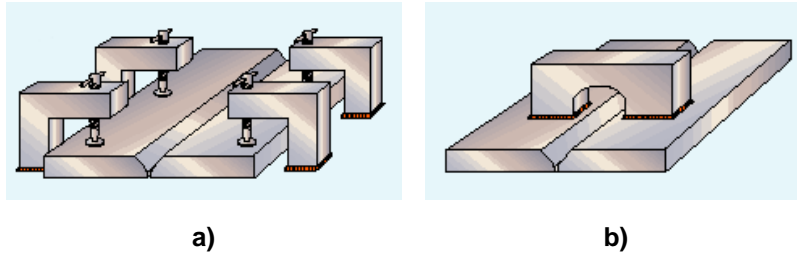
Restraints applied in assembly to prevent distortion: a) welding jig and b) strong-back [8]
